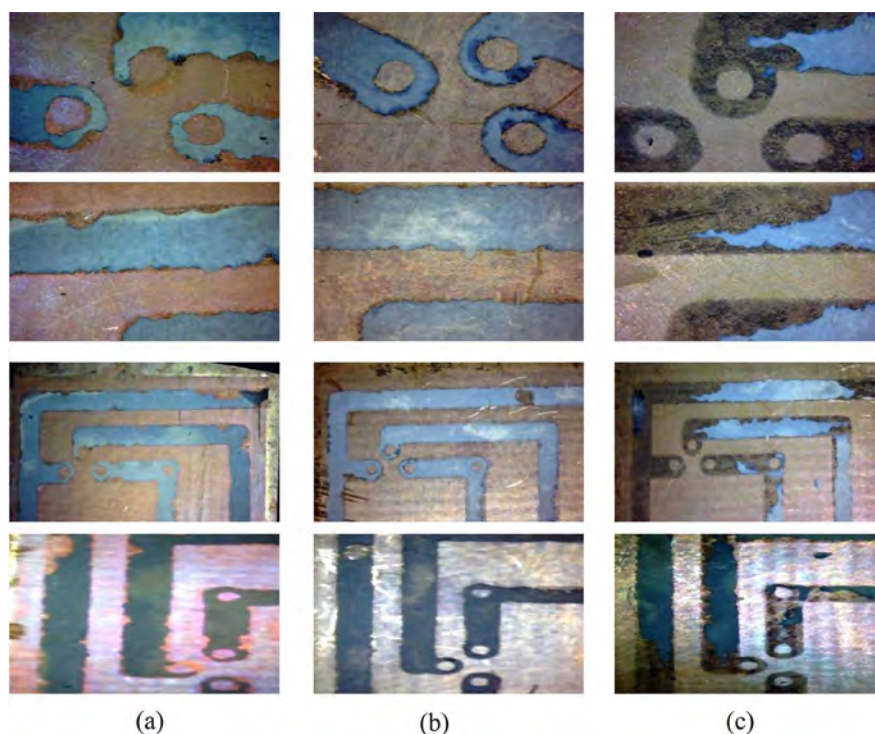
The circuit layout printed on the PCB. (a) Before exposure; (b) Facing to the cathode; (c) Facing to the anode.
